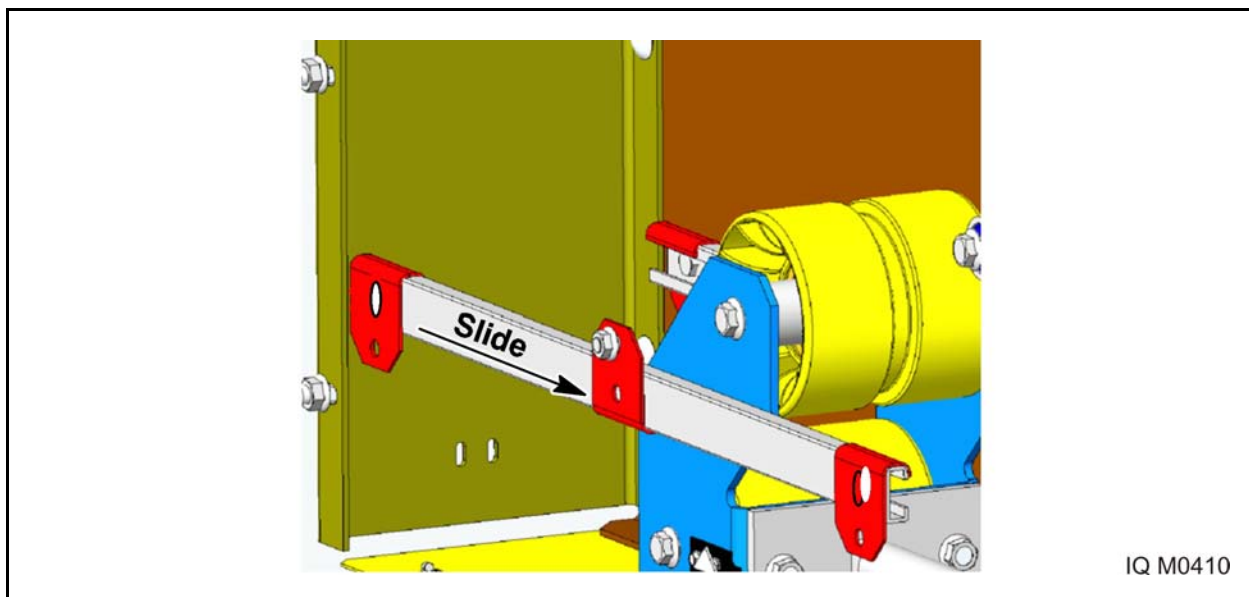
62 Tensioner Guide Tracks (installing the dual idler take up assembly)
